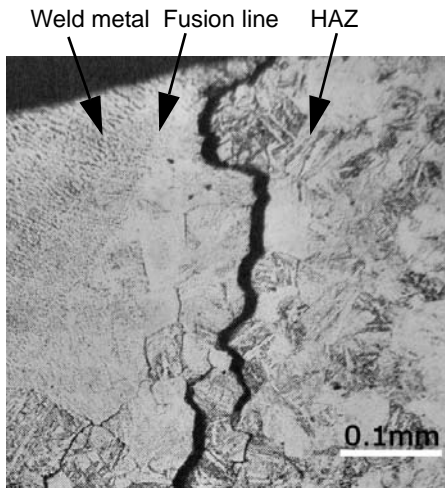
Typical SR cracks occurring in a 780-MPa high tensile strength steel weld (PWHT: 600°C × 2 h) [Ref.1]
